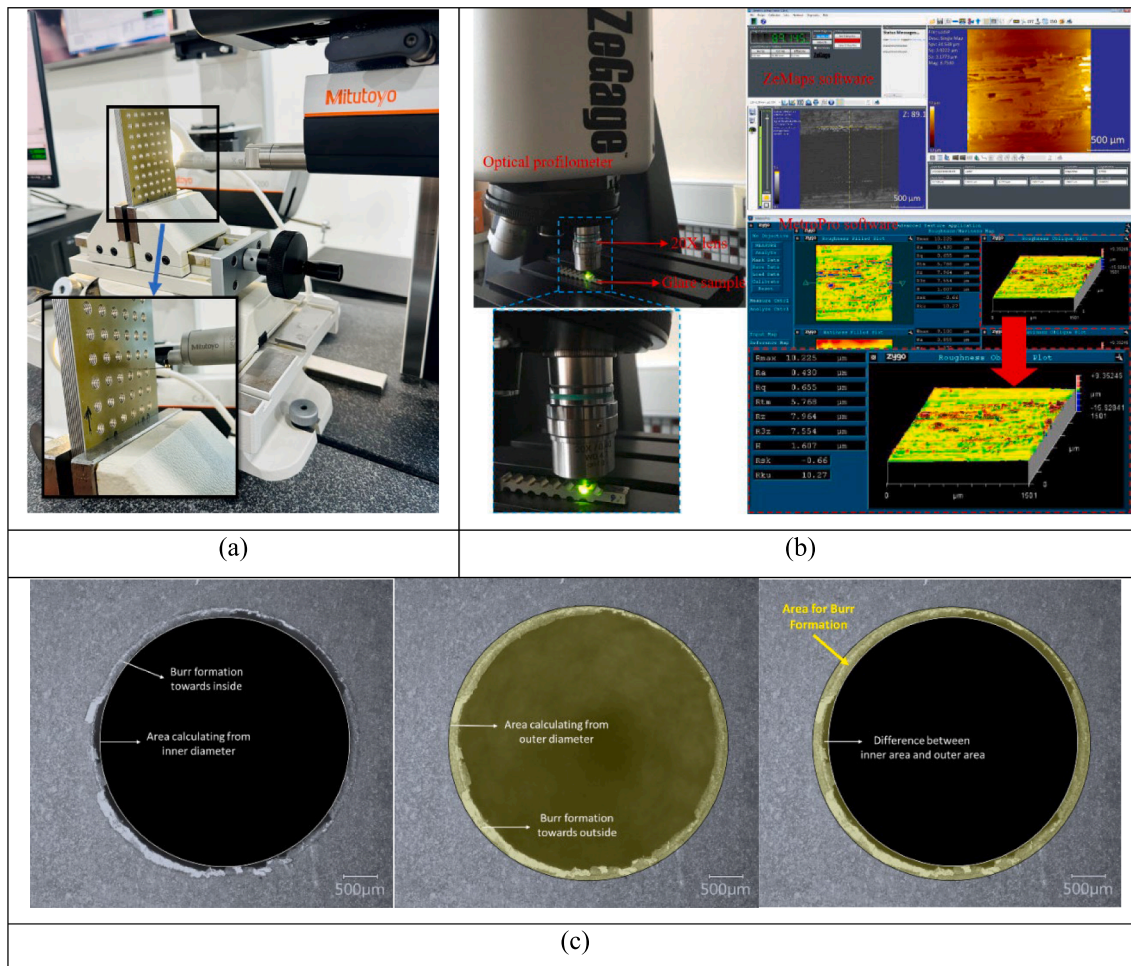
Schematic illustration of the (a) 2D surface roughness tester (courtesy of Mitutoyo) (b) 3D surface roughness inspection (c) steps used to measure the burr area around the hole entry and exit, from left to right, 1st circle is placed at the hole edges, 2nd circle is placed to encompass the burr region, then the area is calculated via ImageJ area function.
